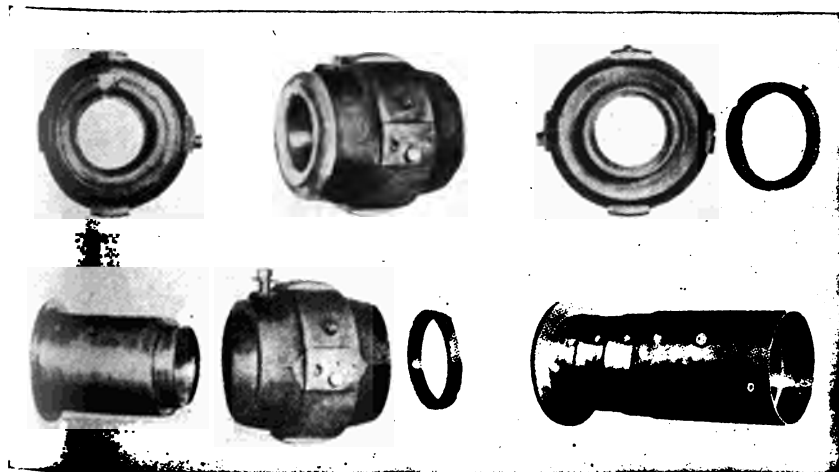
SEC. 3.—High-speed Westinghouse turbine bearing
